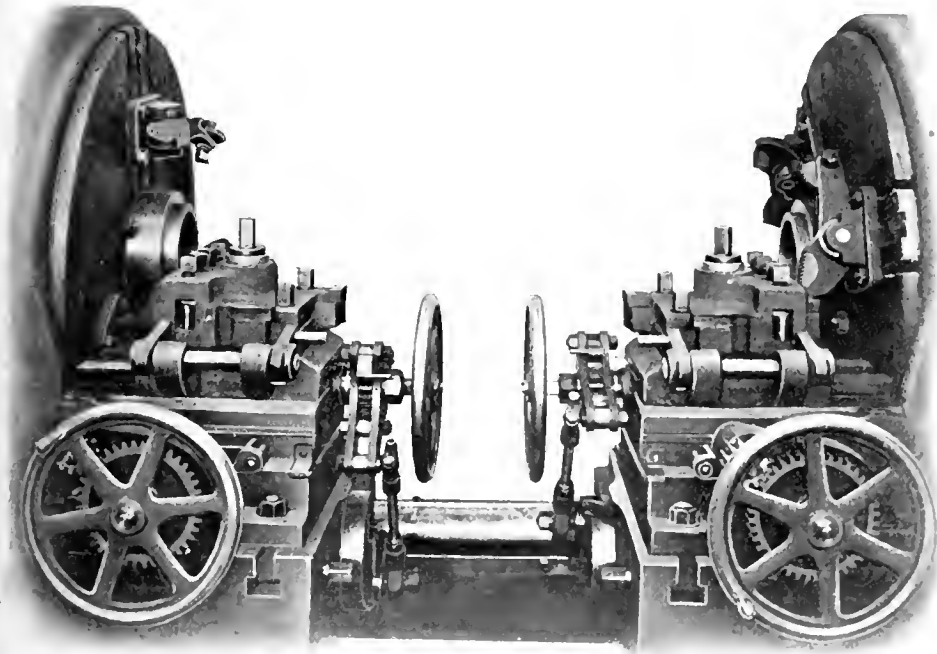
Turret Tool Heads and Carriages, Sellers Car-wheel Lathe
